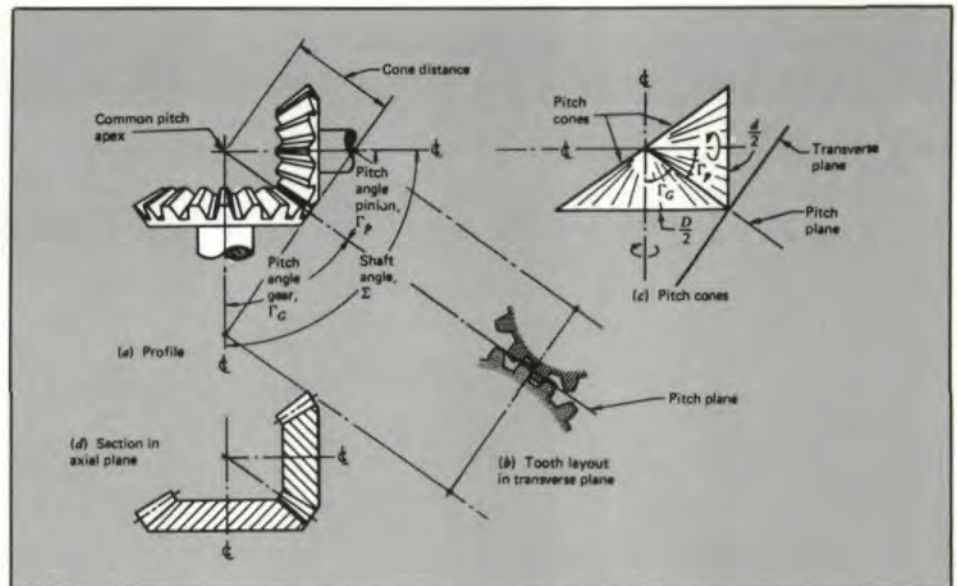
Basic bevel gear sections. (Courtesy General Motors Corporation.)
